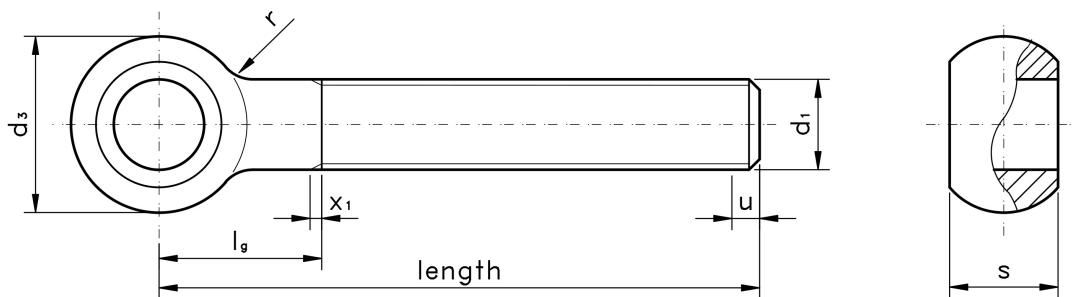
Swing Bolt / Eye Bolt Type B with full thread
